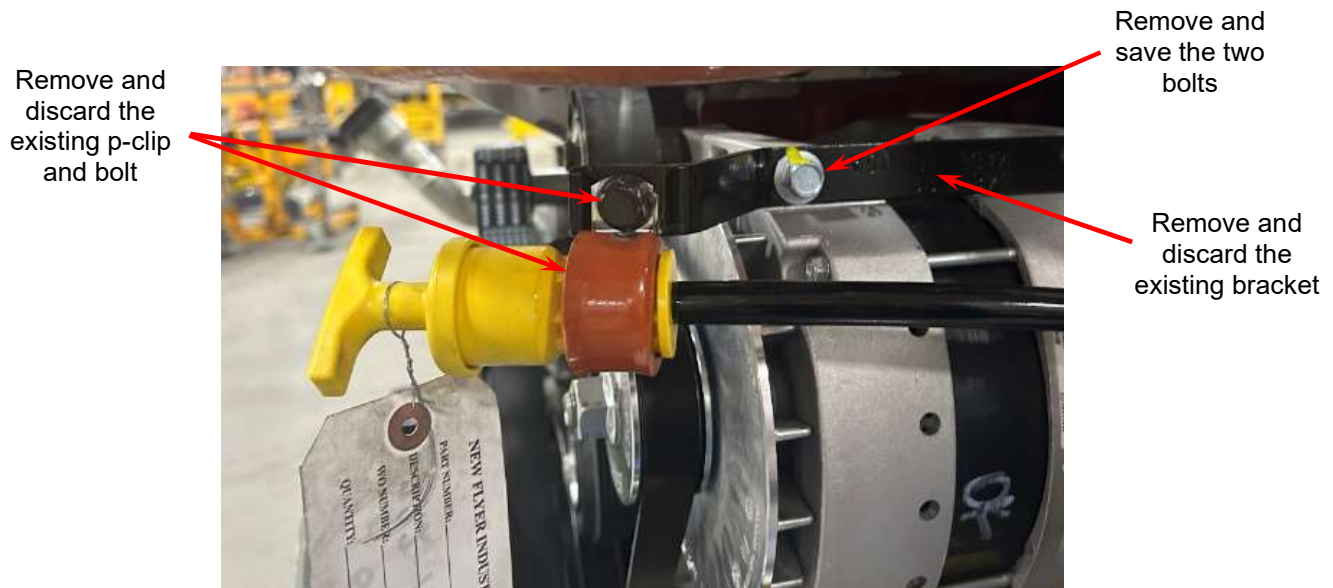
Existing Oil Tube Dipstick Support Bracket Removal
